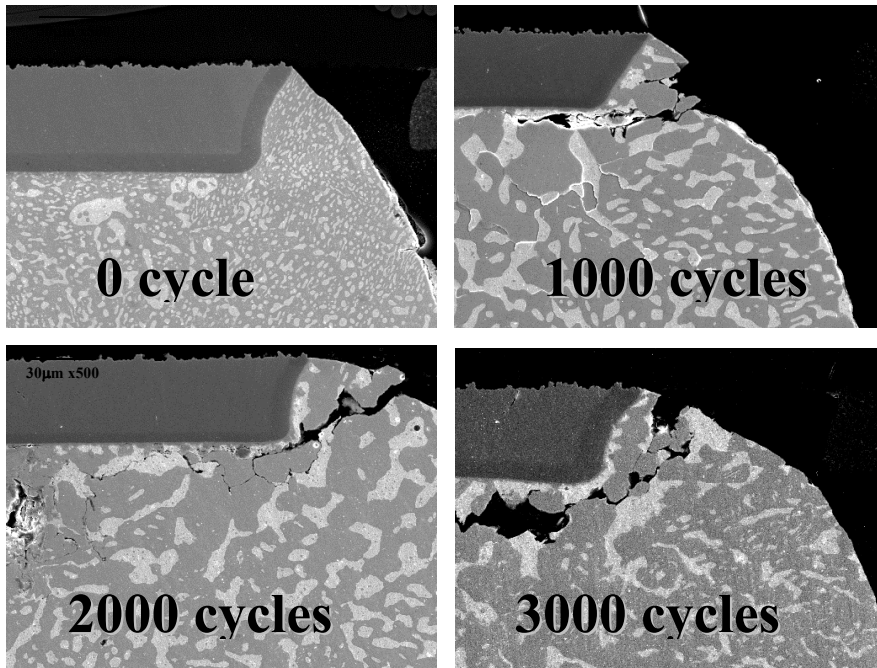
Solder Joint Progressive Crack 17mm BGA, V1
